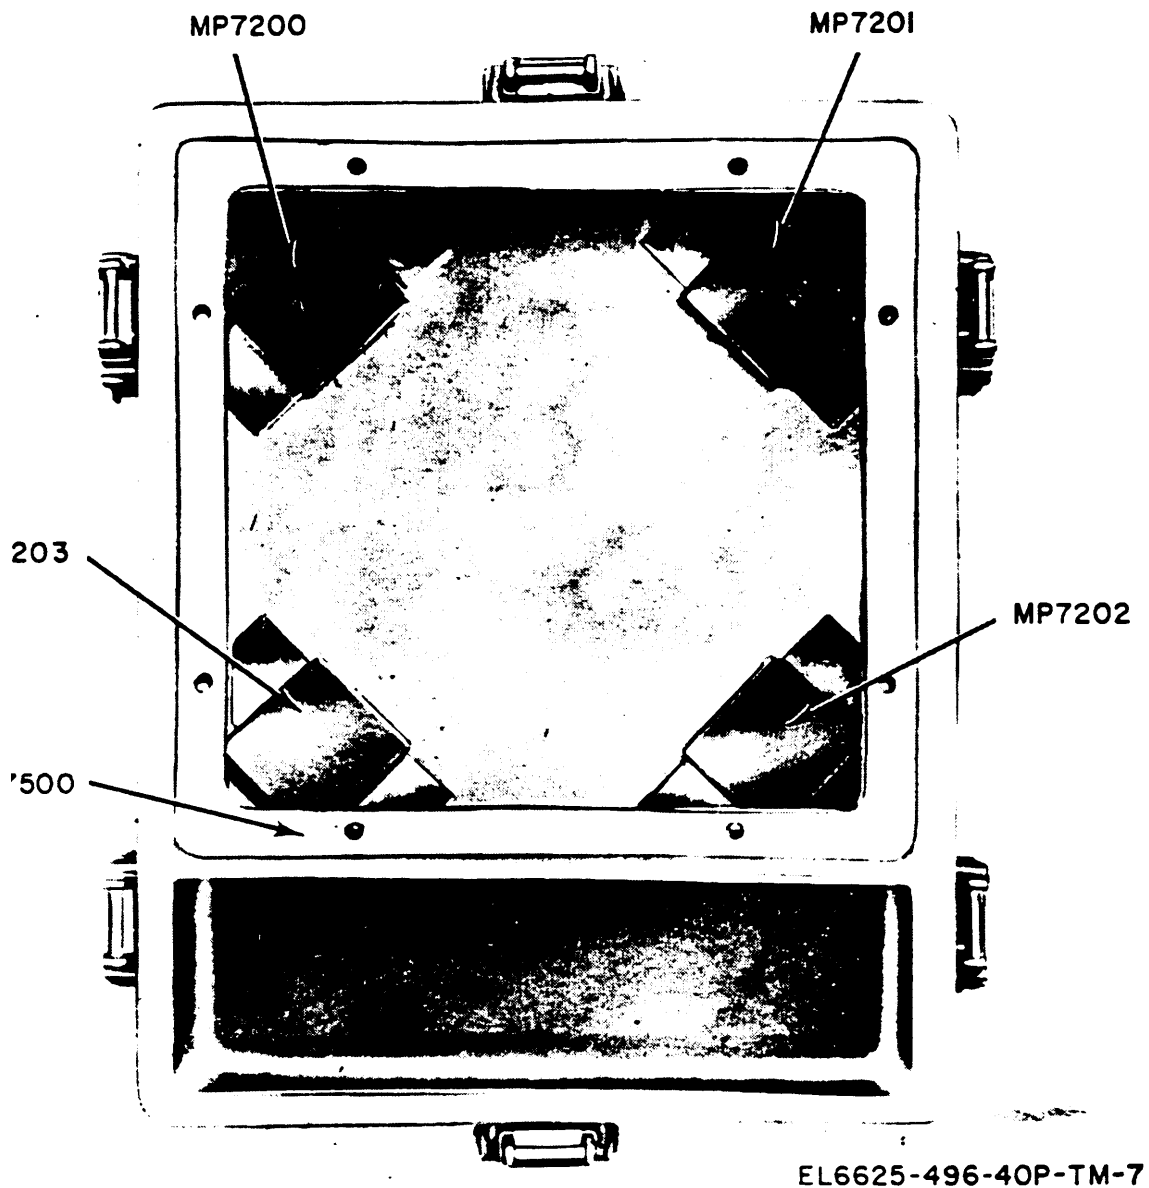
Case, test set removed, gasket and bumpers (AN/VRM-1).
